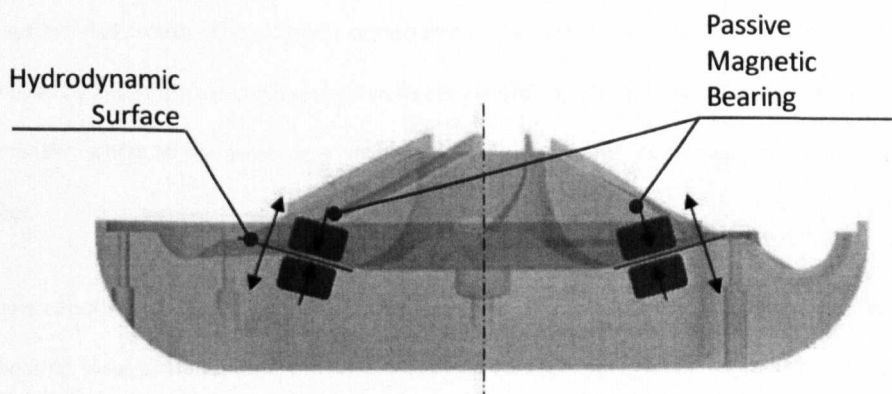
Pump cross-section: Passive magnetic bearing acts to force impeller and casing together. Hydrodynamic bearing acts to force the components apart.
